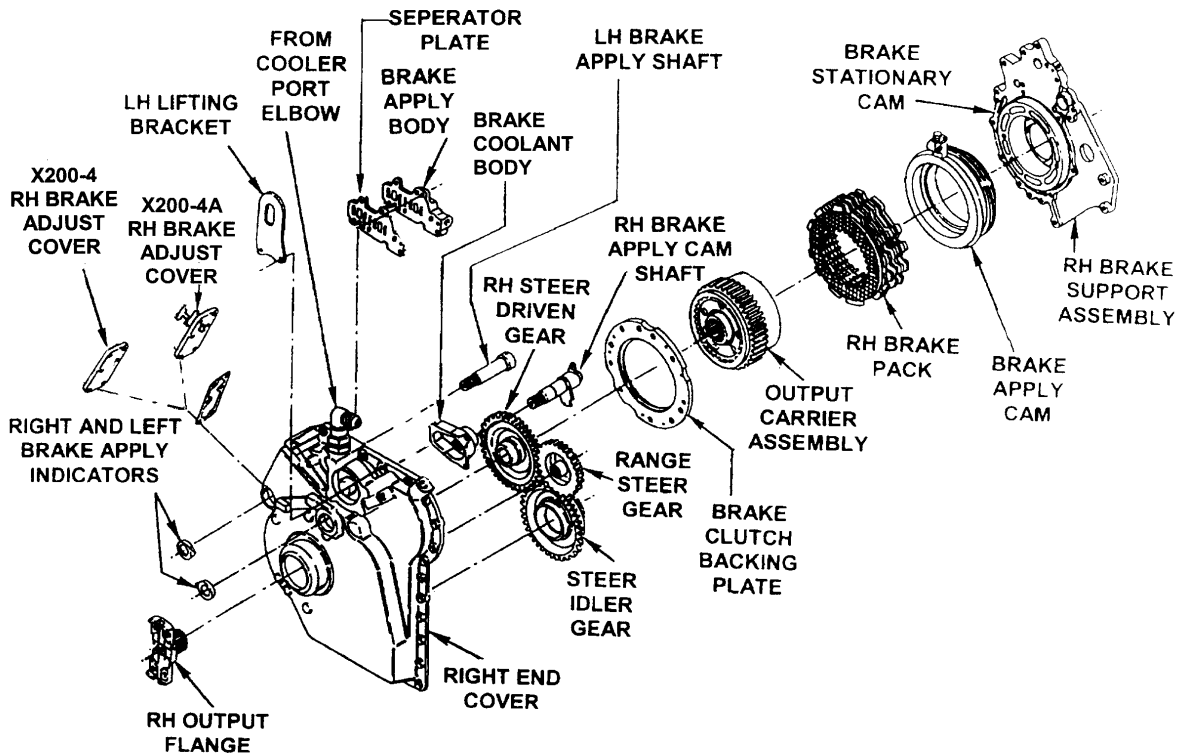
Exploded View of Major Components Right End Cover Assembly.
